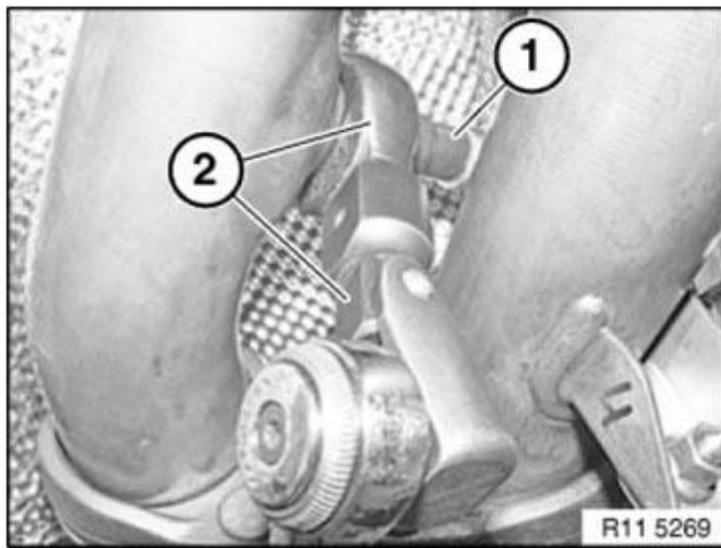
Removing Lambda Monitoring Sensor Plug Connection Using Special Tool (11 9 150)
